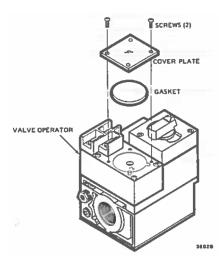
Exploded view of "B" model combination gas control showing blank cover plate.
